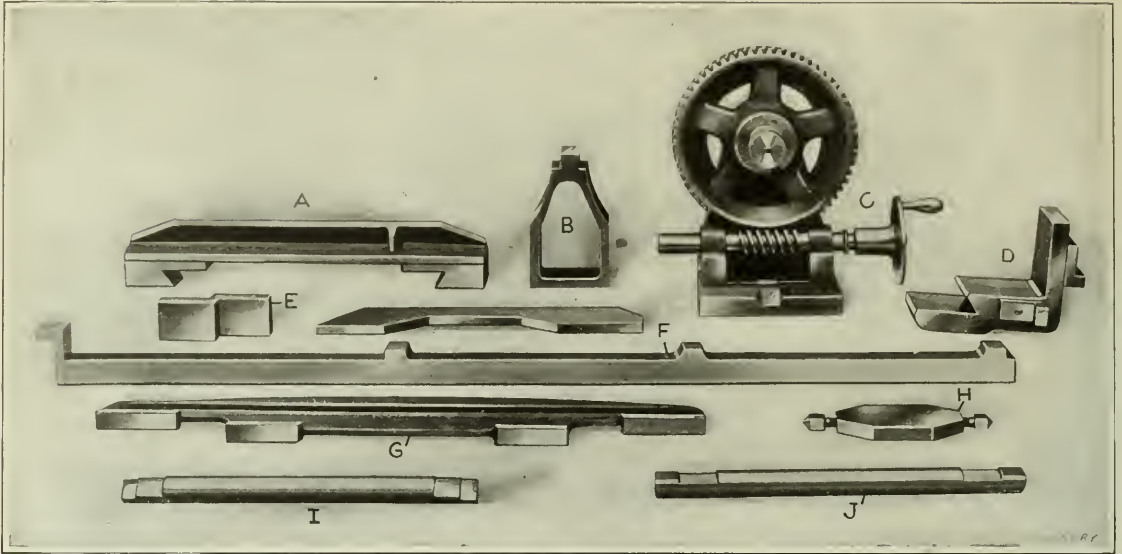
A, Width Gage for Ways of Bed; B, Gage for Lead Cams; C, Cam-shaft Worm and Gear Testing Fixture; D, Gage for locating Index Bracket Faces from Ways; E, Locating Gage for Ways of Chuck Operating Slide; F, Gage for Gear-box, Table and Ways; G, Gage used with Boring Fixture; H, Center Gage used in planing Beds; I, Gage for Cylinder Carriage Cap Bearing; J, Gage for Cylinder Cap Bearing
